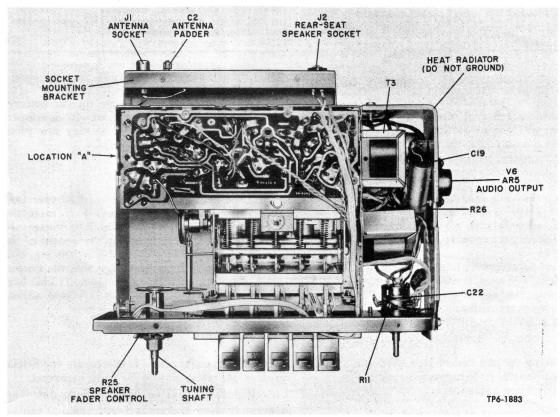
Bottom View of Philco Model C5705, Showing Location of Parts
